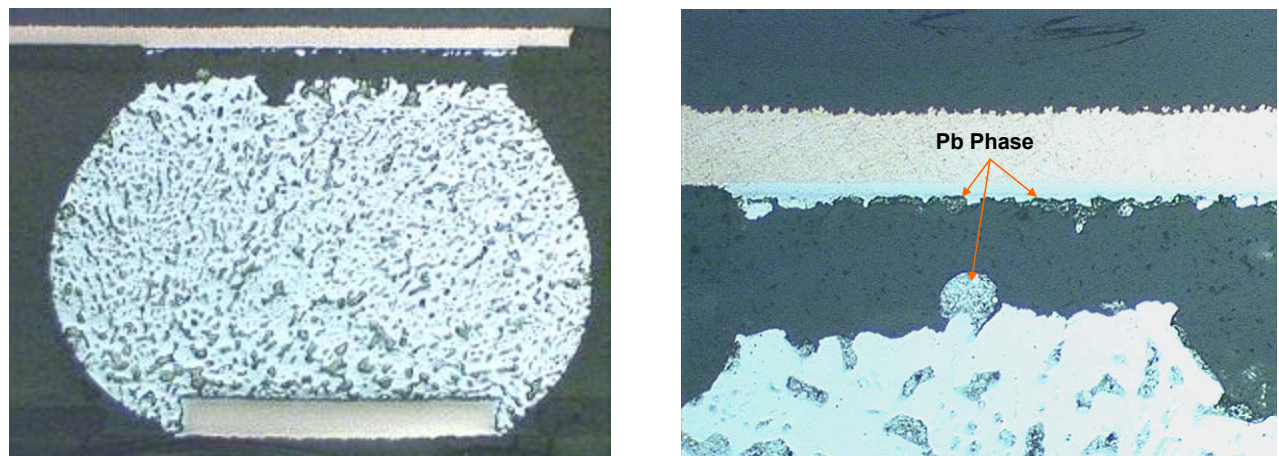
(left) BGA-225 SAC-SnPb combination solder joint; (right) magnified view of crack with Pb phase present
